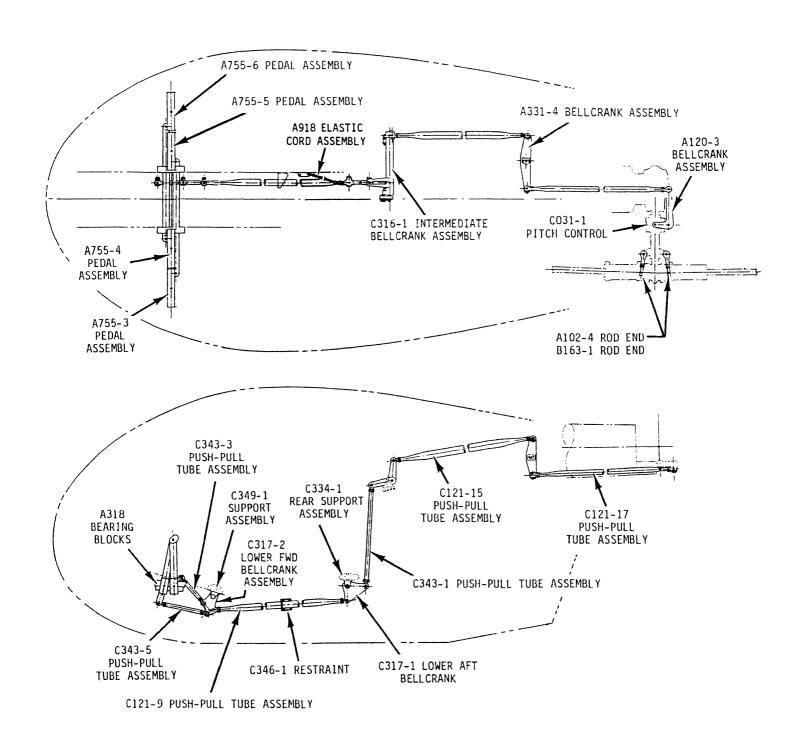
TAIL ROTOR FLIGHT CONTROLS
